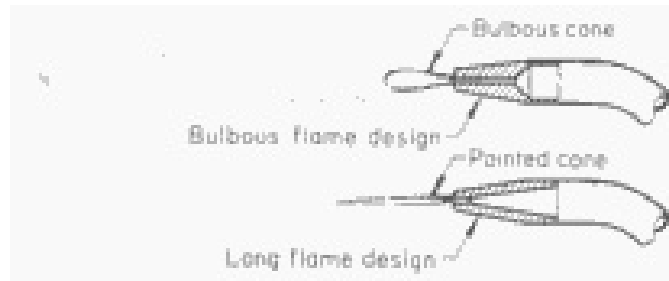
VARIATION IN THE SHAPE OF THE INNER CONE OF AN OXYACETYLENE WELDING FLAME PRODUCED BY WELDING TIPS WITH TWO DIFFERENT BORE SHAPES. VARYING THE TRANSITION TAPER PRODUCES CONE SHAPES INTERMEDIATE BETWEEN THOSE SHOWN.
